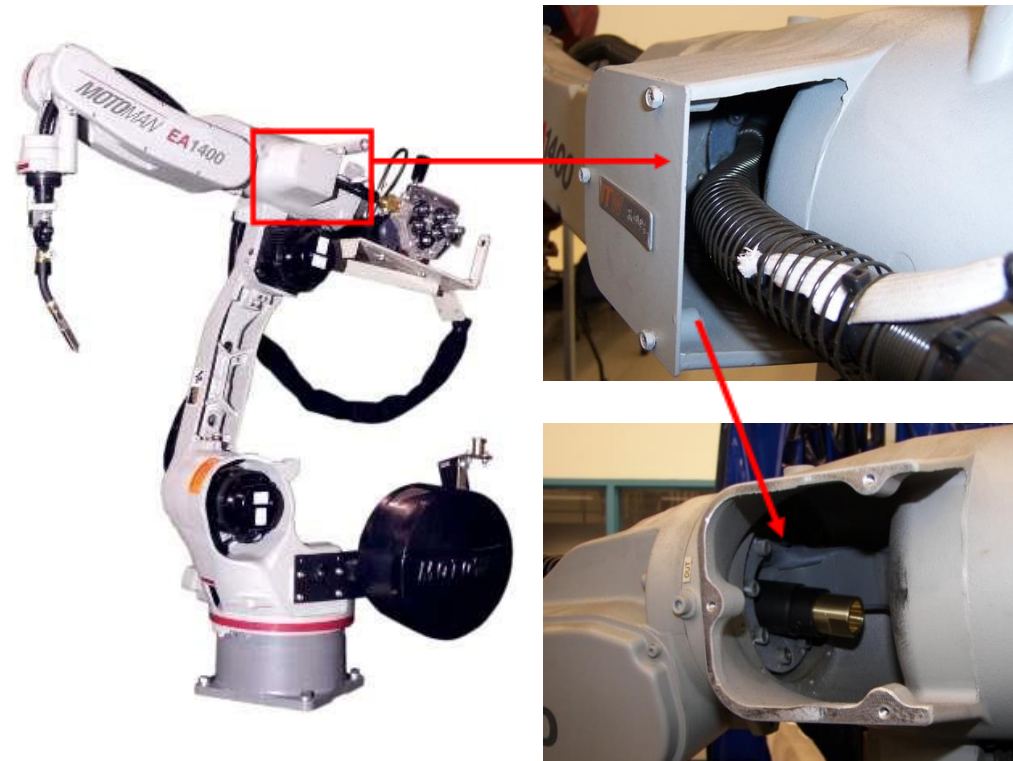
Insert the back end of the LSR unicable through the hole in the casting of the upper arm.
